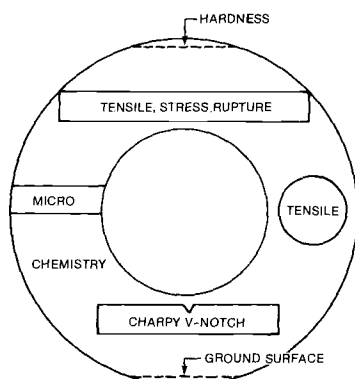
Layout of specimens in HP rotor bore core samples machined from low- and high-temperature locations, BCS Nos. 1 and 3.
